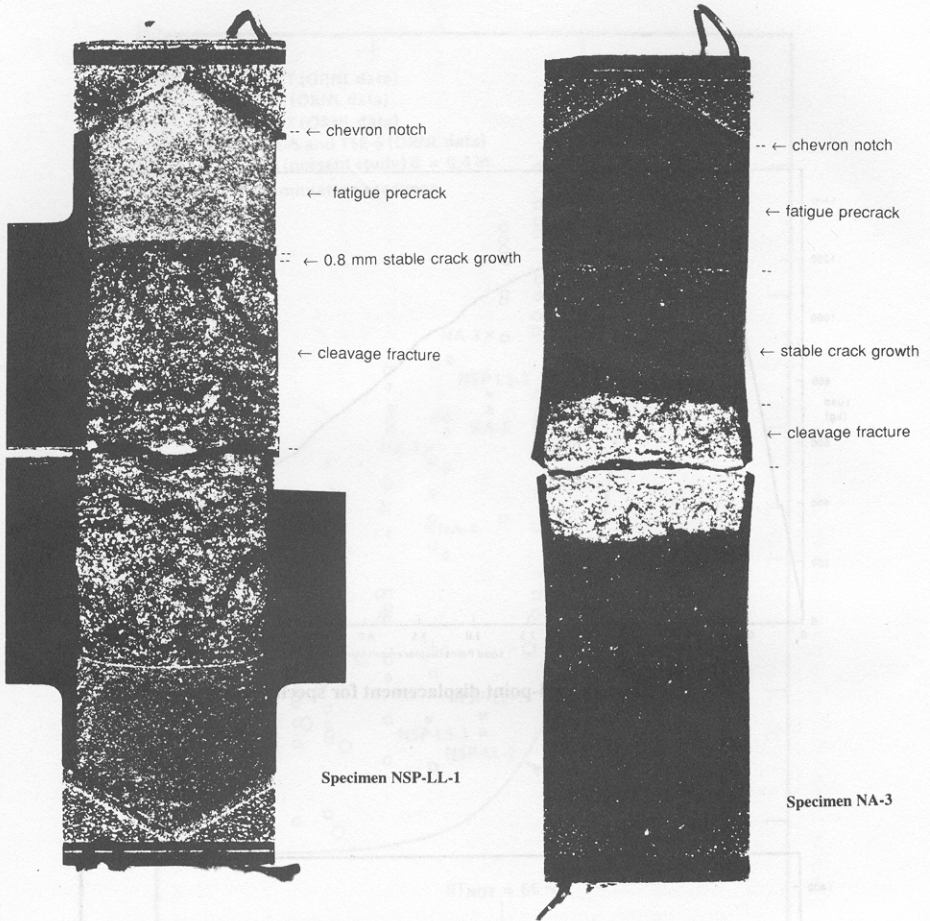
Fracture surfaces for specimens NSP-LL-1 and NA-3 showing cleavage in NSP-LL-1 at a test temperature where ductile fracture would be obtained without the side-arm constraint
